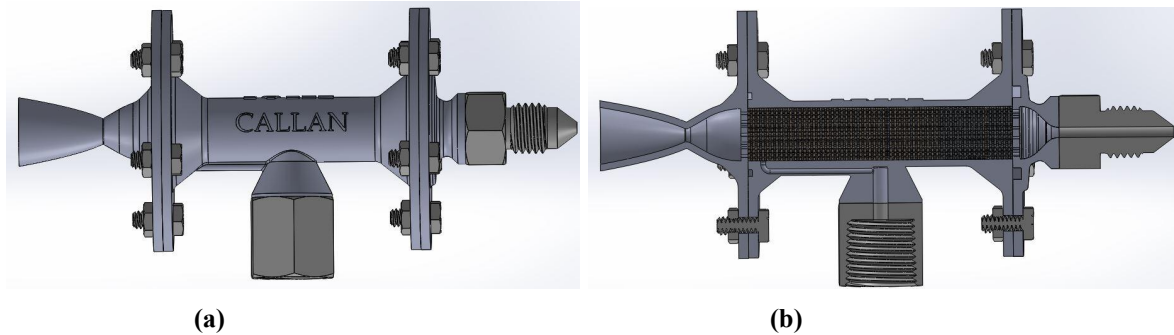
(a) CAD model side view of the Callan monopropellant thruster. (b) CAD model side view cross section of the Callan monopropellant thruster.
